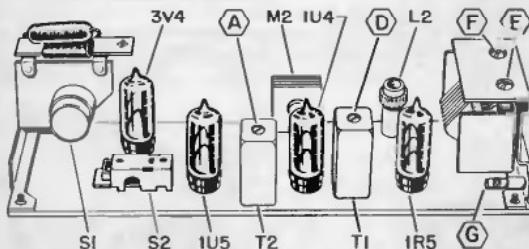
Top View of Chassis 200. Tube Locations and Alignment Points Shown.
